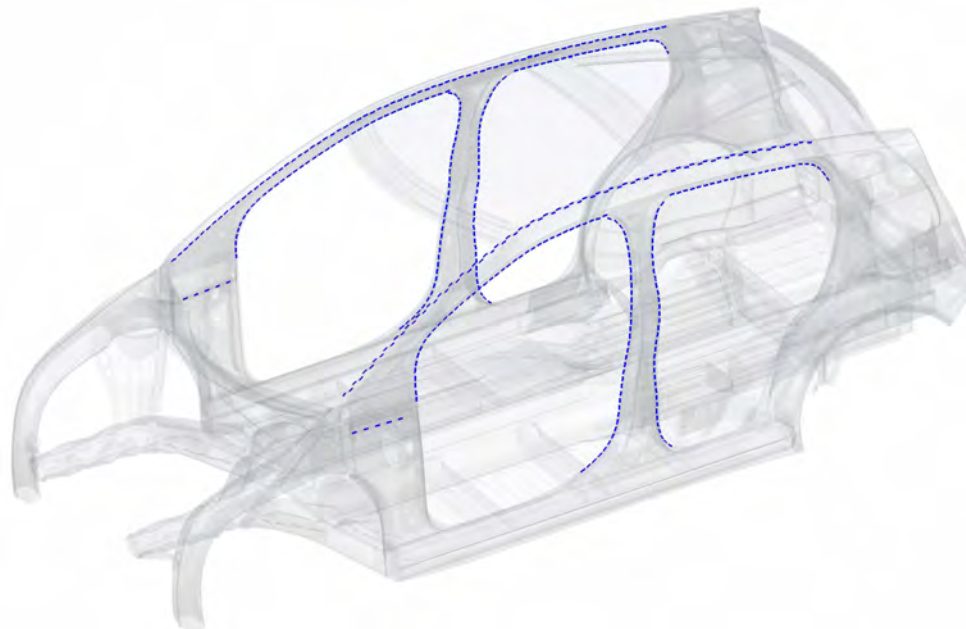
FSV laser welding (stitch pattern)
